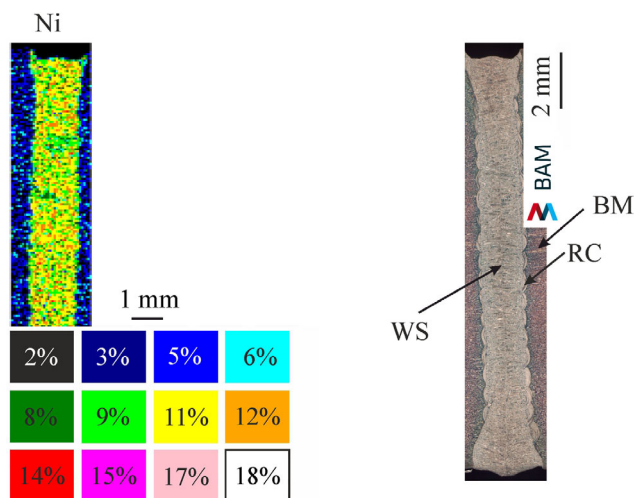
EDX-measurements: a) Nickel contents in wt%, b) Cross section of weld seam with location of point measurements (WS-Weld seam, BM-Base material, RC-residual coating).
